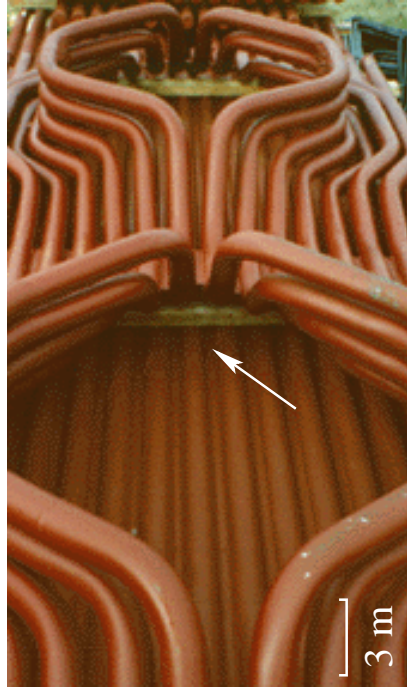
Complex shapes of boiler tubes used in power plant. The arrow shows two boiler tubes joined together with a supporting plate.
